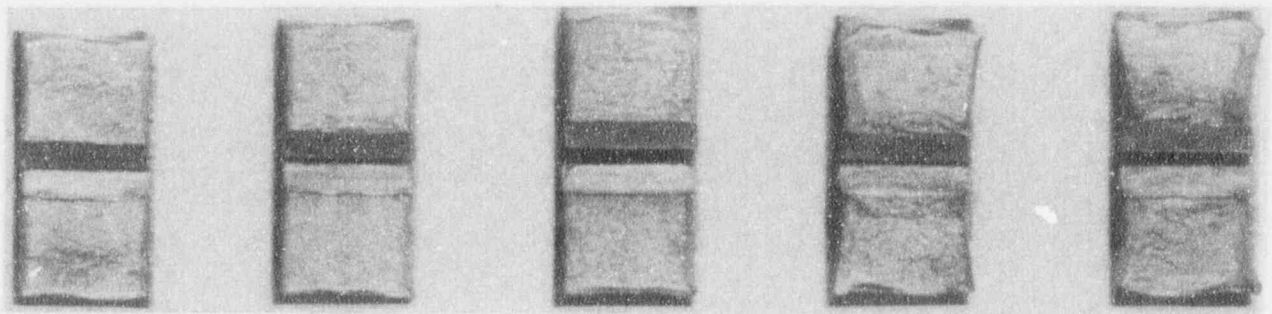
Charpy Impact Specimen Fracture Surfaces for Vogtle Unit 1 Reactor Vessel Intermediate Shell Plate B8805-3 (Transverse Orientation)
